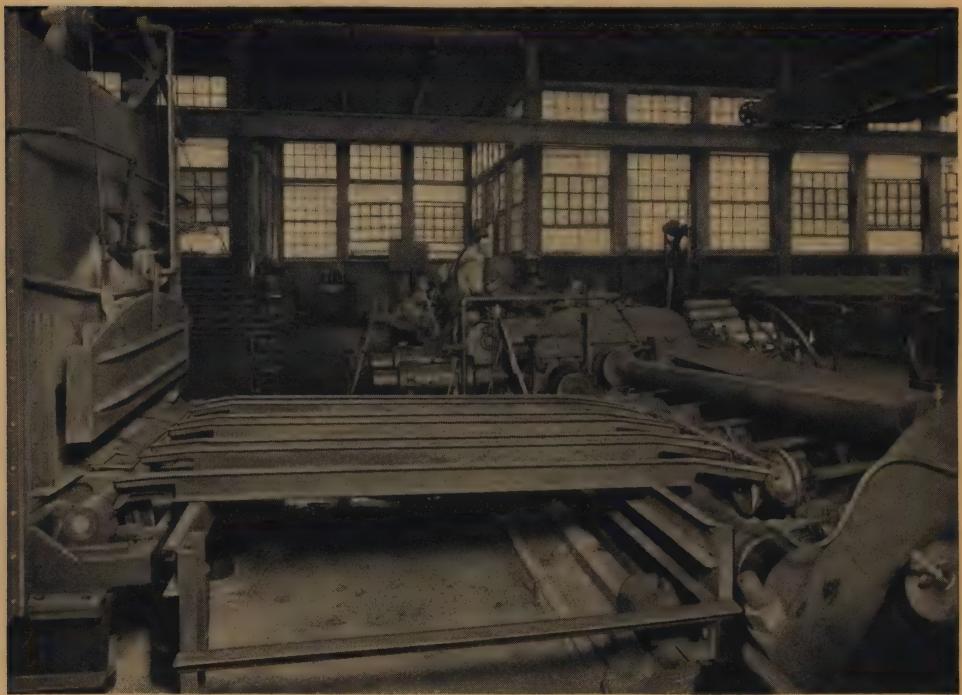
A hot billet has just left the heating furnace shown in Figure 36 and is about to enter the piercing machine, where it will be subjected to the cross-rolling action of three rolls placed at an angle to the axis of the billet and in such a way that the point of contact describes a spiral drawing the billet forward. Just as the billet leaves the rolls it encounters the hardened point over which it is forced to travel, the function of which is to open up the billet and form it into a tube.
